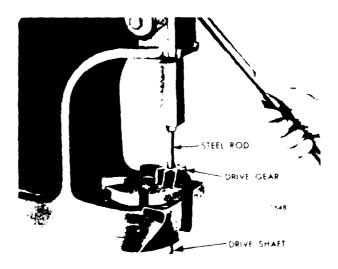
E-6. Removing Oil Pump Drive Gear from Shaft
